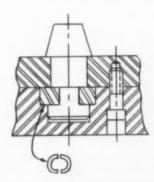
Split-collar retainer. Simple design and short shank require a minimum of space.
